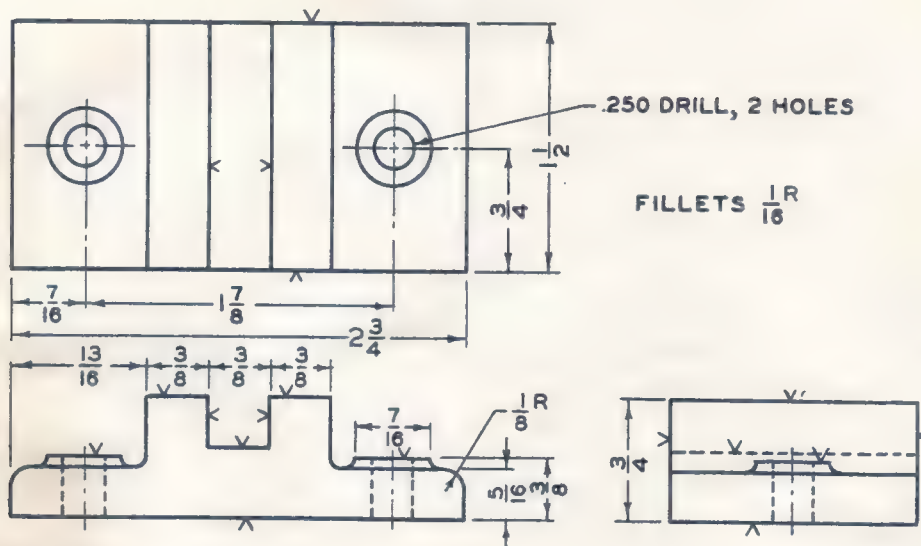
WORKING DRAWING OF FORGING SHOWING APPLICATION OF FINISH MARKS
